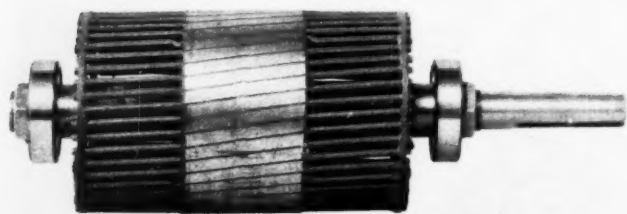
Rotor construction consists of extended winding and large capacity ventilating fans
